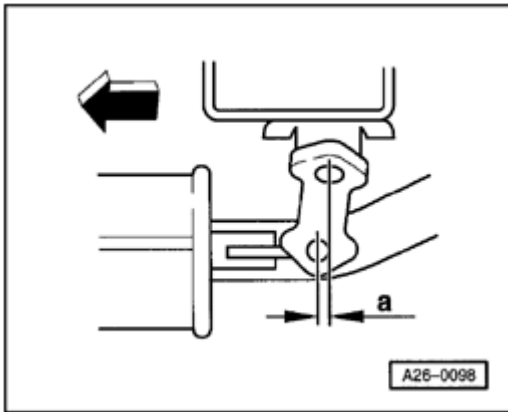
Pushing Rear Section Of Exhaust System Toward Front Of Vehicle
